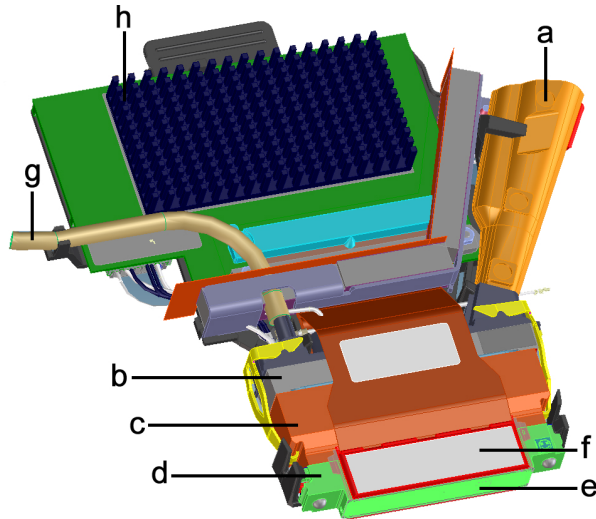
3D CAD drawing of a printhead showing (a) the melting unit, (b) the filter units, (c) the reservoir, (d) the central part, (e) the nozzle plate, (f) the piezo actuator units, (g) the static pressure hose, and (h) the electronic driving supply.
